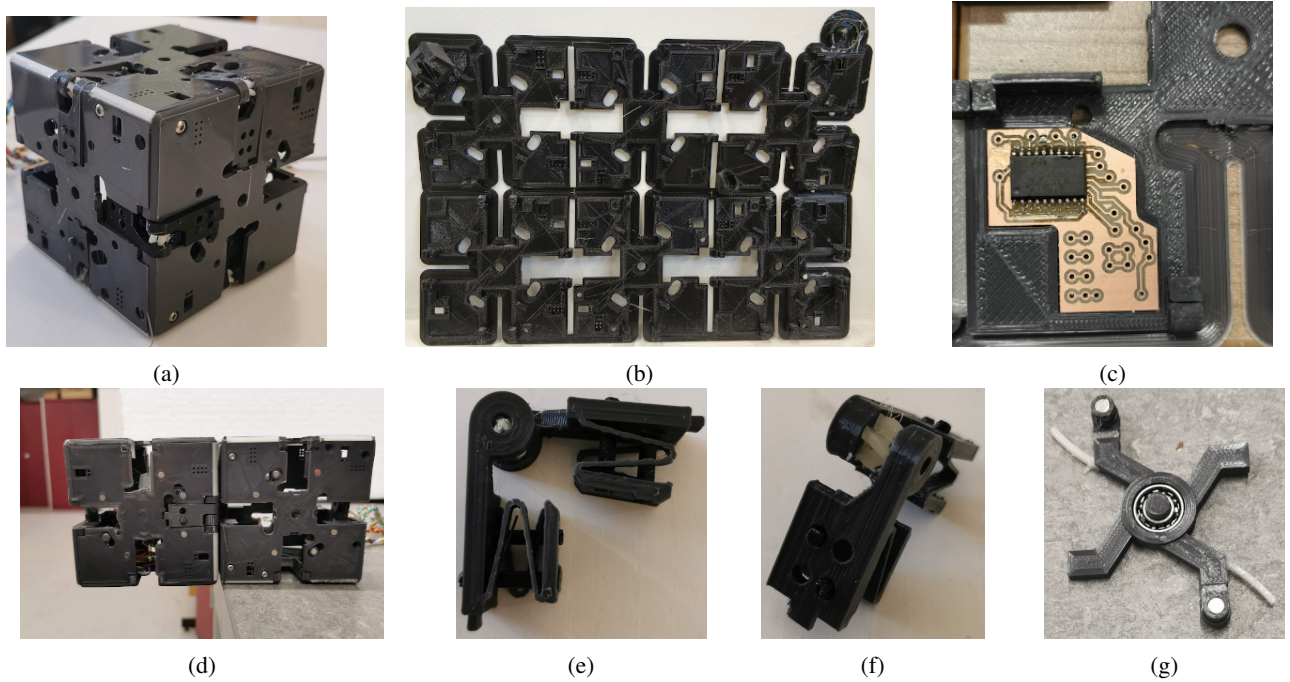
Prototype of the proposed module:(a) Frame assembled; (b) Faces of the module printed in one batch; (c) PCB for the motor driver; (d) One module supporting the weight of another one; (e) 3D printed gate showing the springs; (f) Gate showing the compliant joint; (g) Base of the mobile magnets with springs and compliant joints.
